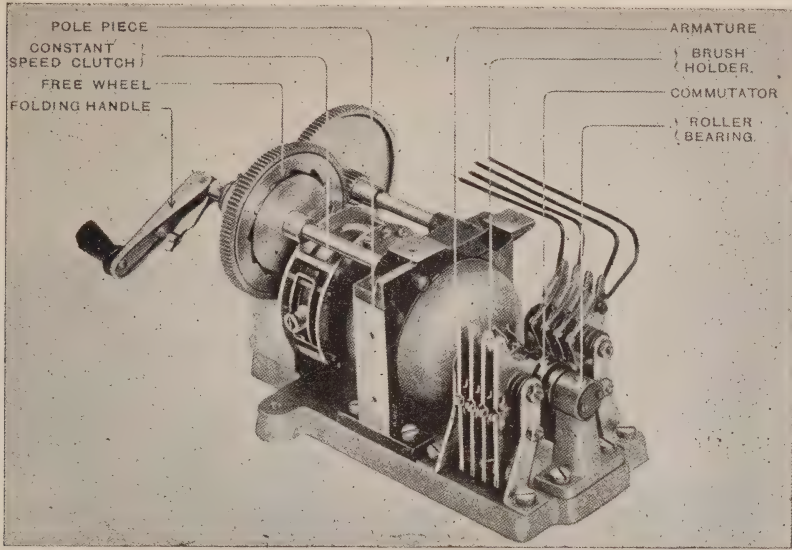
View of constant pressure generator, Bridge-Megger type.
